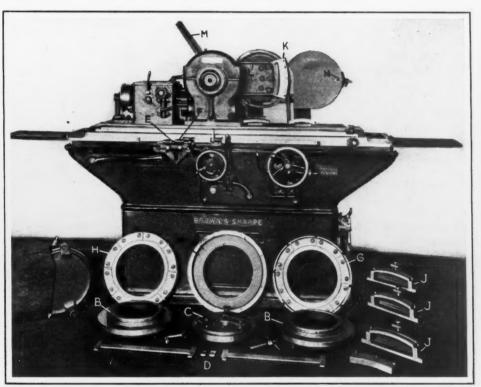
Universal Grinding Machine Equipped for Grinding the Inside and Outside Edges of Thin Radial and Helical Knives
